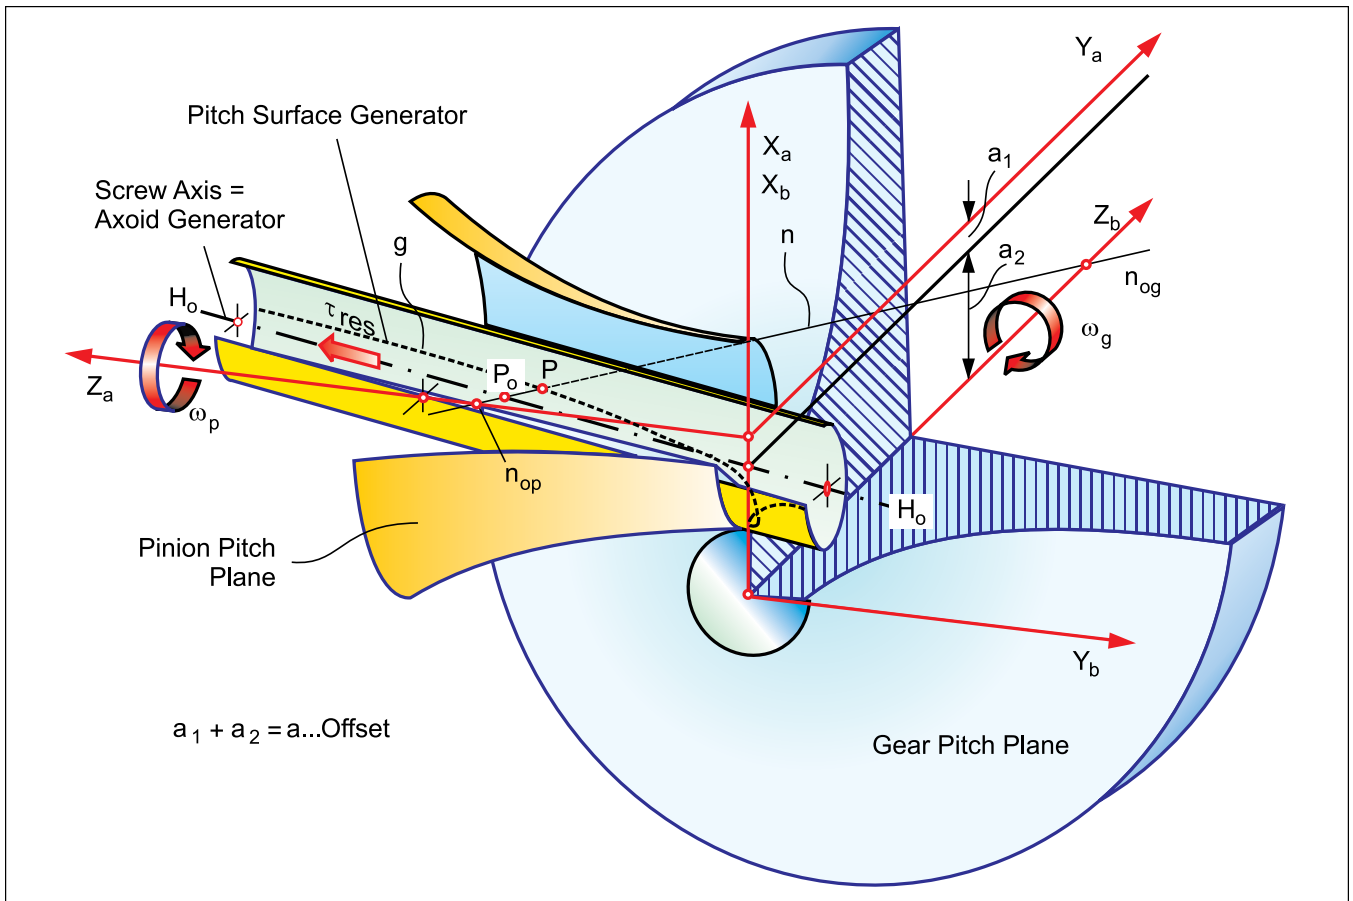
Axoids and pitch surfaces in gears with screw motion.
